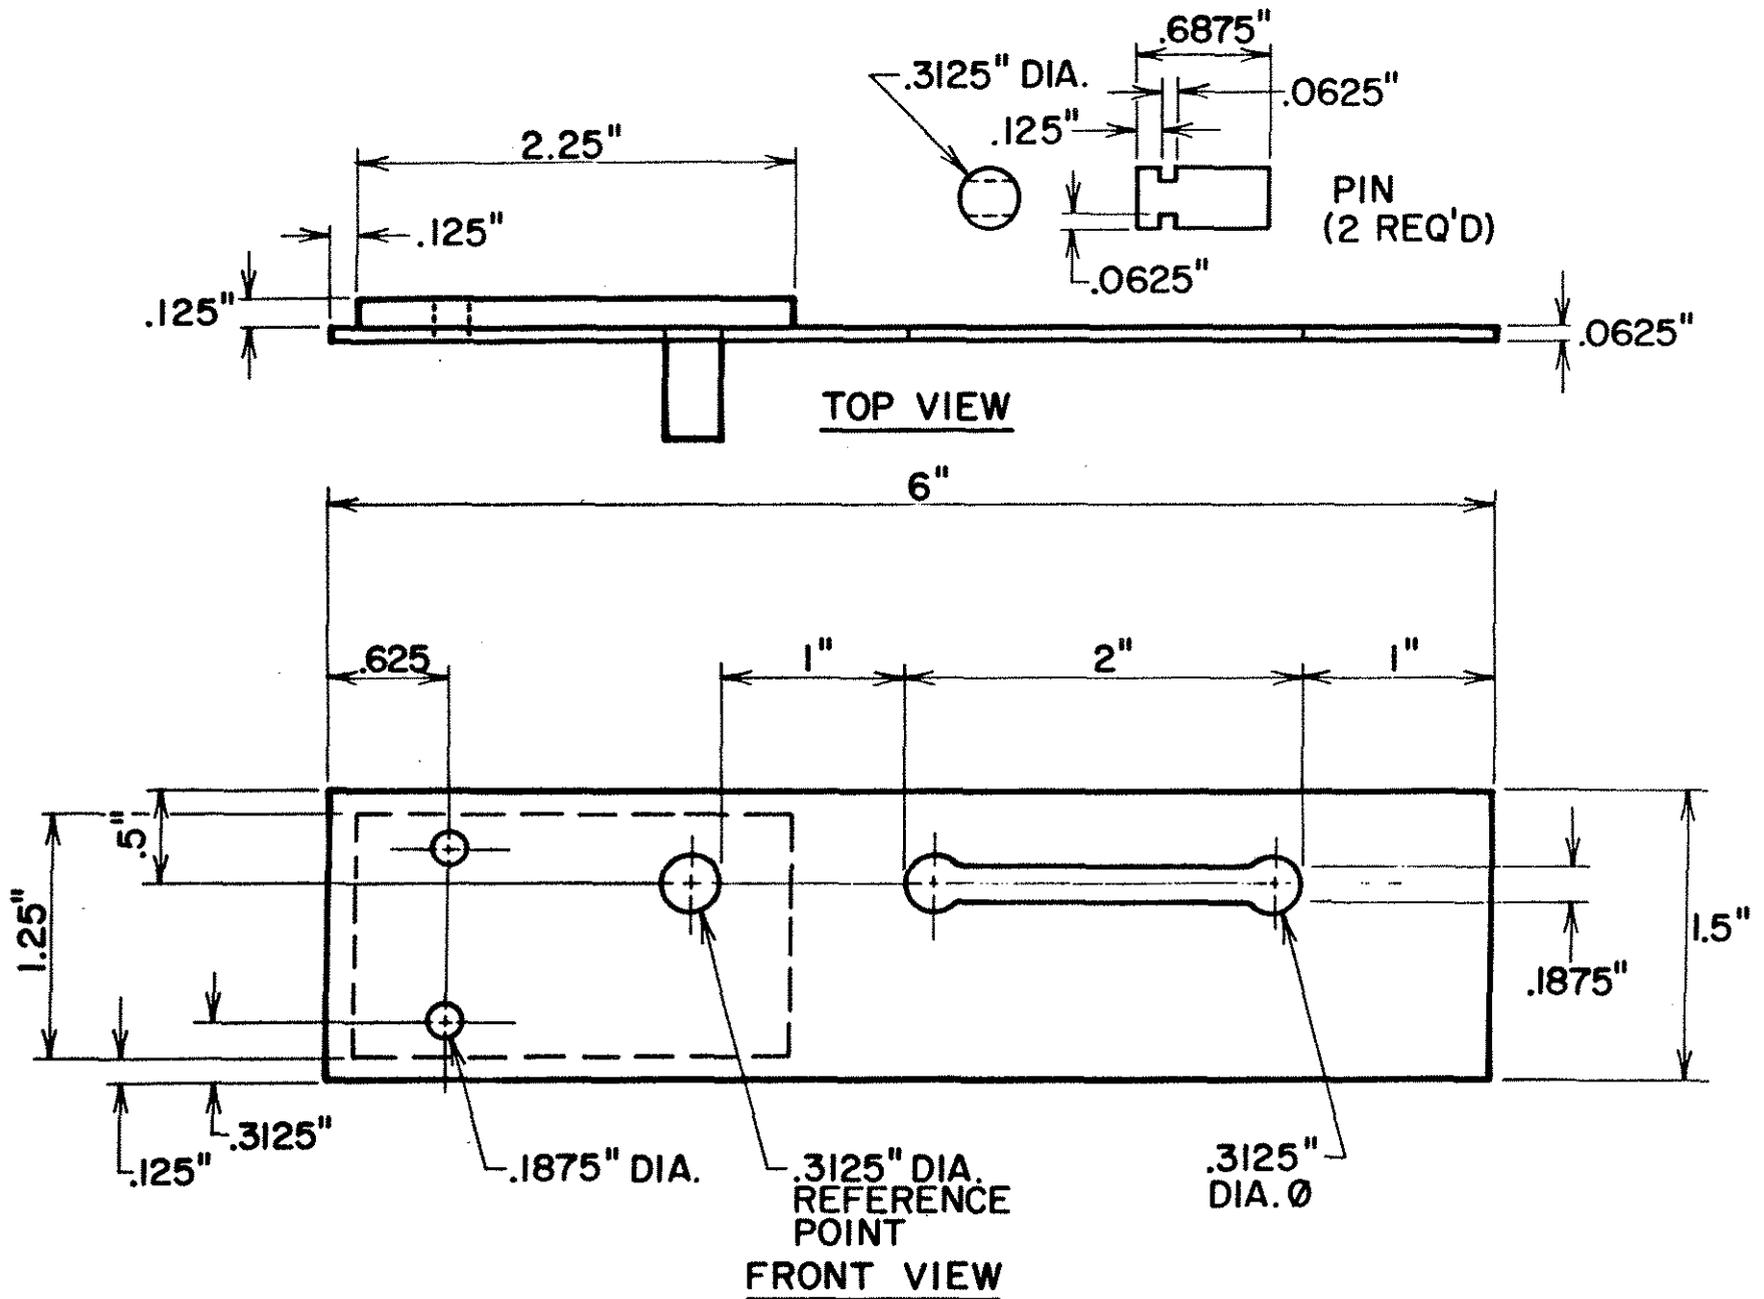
Engineering drawing of the base plate of the crack monitor gauge.
